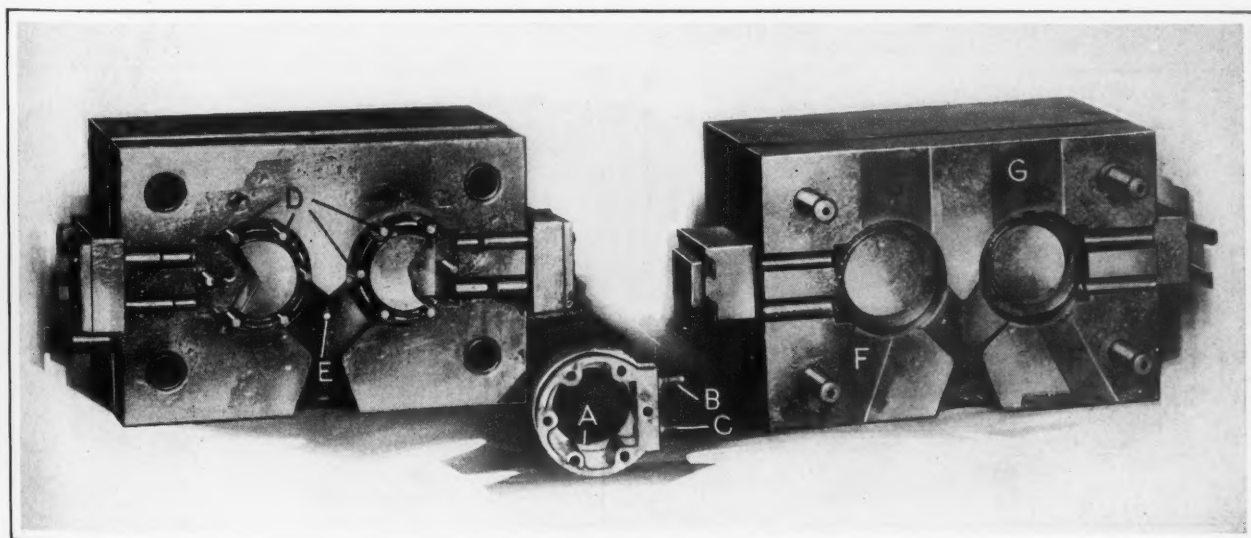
Construction of Die Used in Simultaneously Casting Two Parts with Threaded Brass Inserts
